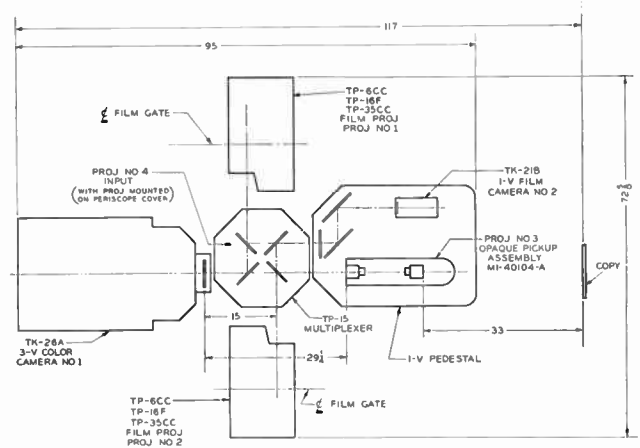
Floor plan showing Opaque Pickup Assembly mounted on pedestal beside the 1-V Film Camera.
